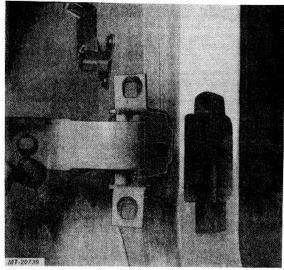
Removing Cab Door Hinge From Hinge Pillar
